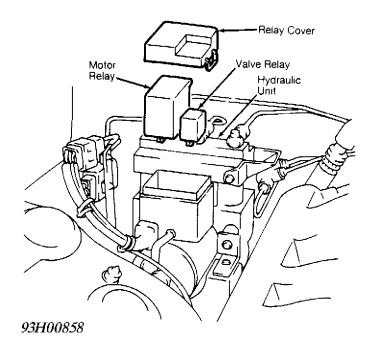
Locating Valve Relay & Motor Relay Courtesy of Mazda Motors Corp.
